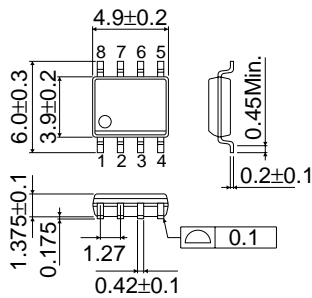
(c) PHYSICAL DIMENSION (Units : mm)
